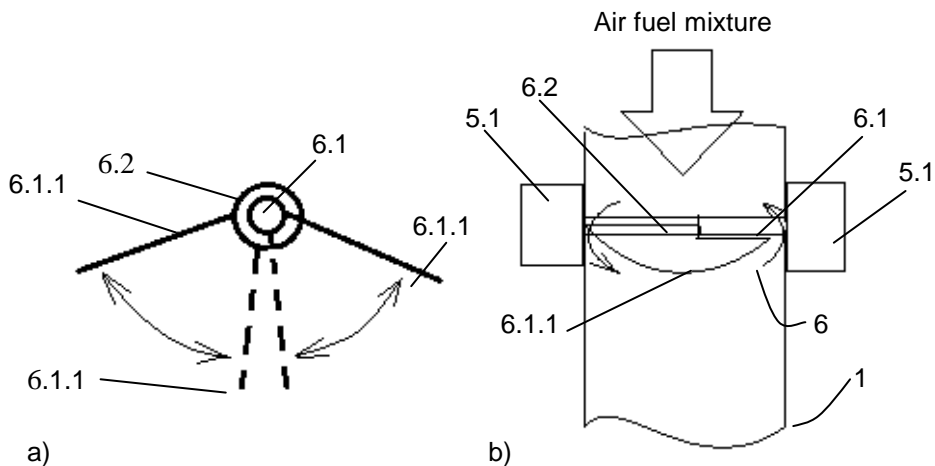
The principle working scheme of a throttle valve: a) the working principle of a throttle valve; b) the position of the throttle valve in the intake manifold; 1) the intake manifold; 6) a throttle valve; 5.1) a step motor; 6.1) the inner shaft of the throttle valve; 6.2) the outer shaft of the throttle valve; 6.1.1) a regulating valve.
